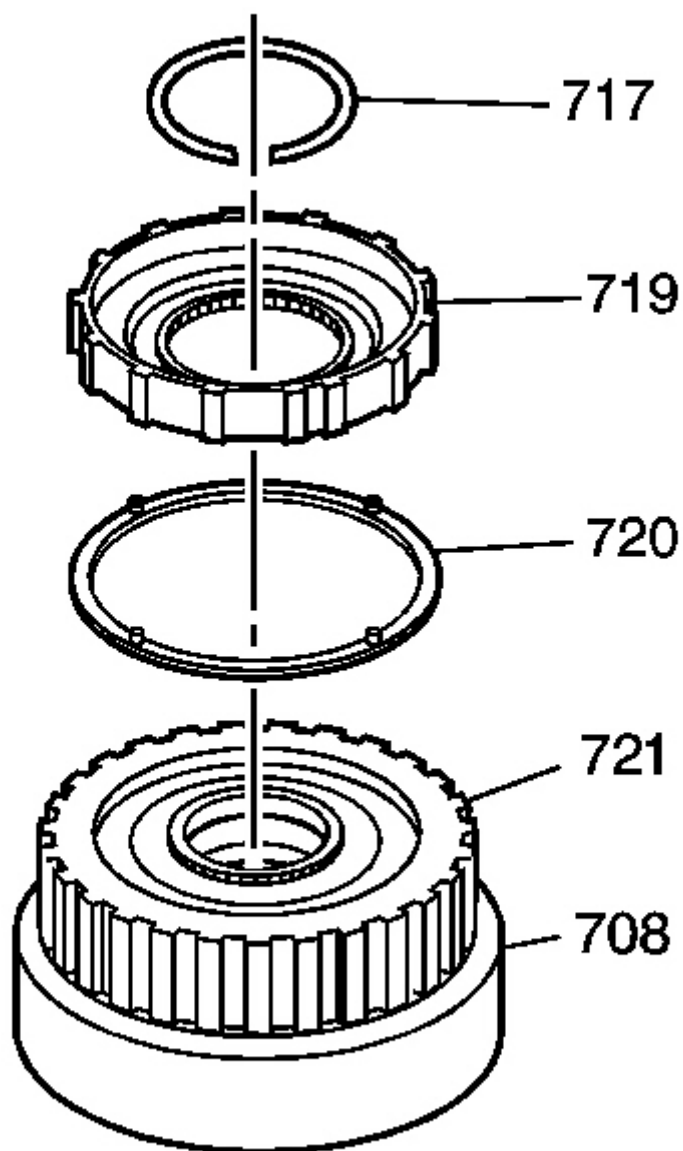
View Of Thrust Washer On Coast Clutch Hub, Input Internal Gear Flange And Snap Ring
